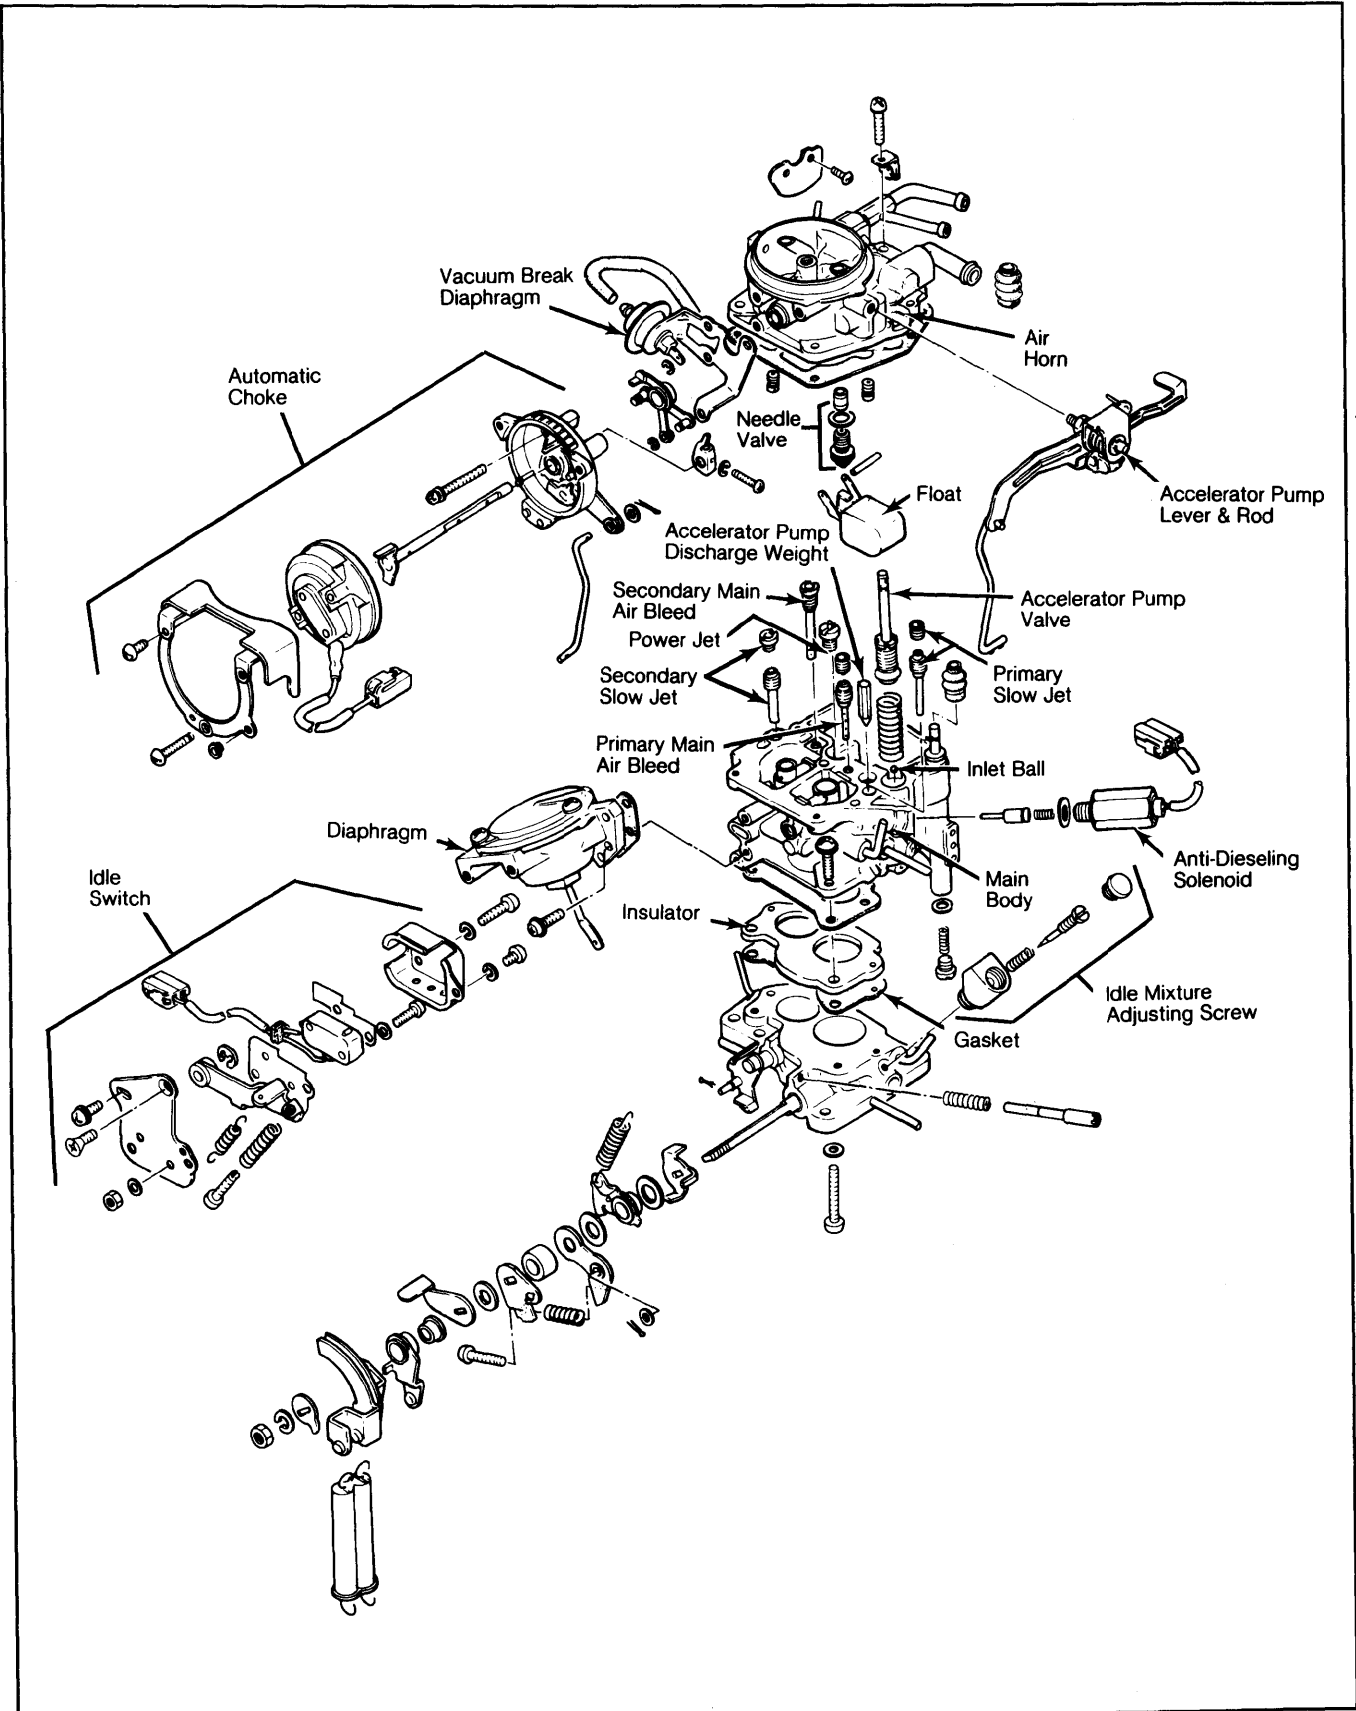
Exploded View of Datsun/Nissan Sentra, 210 & 310 Hitachi DCR 306 Carburetor
